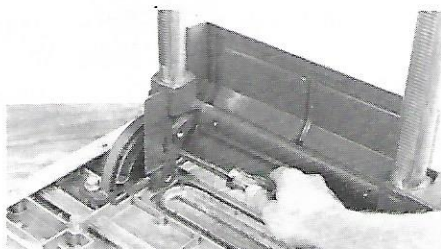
Front shield slips over slotted screw head. Tighten the slotted screw securely.
